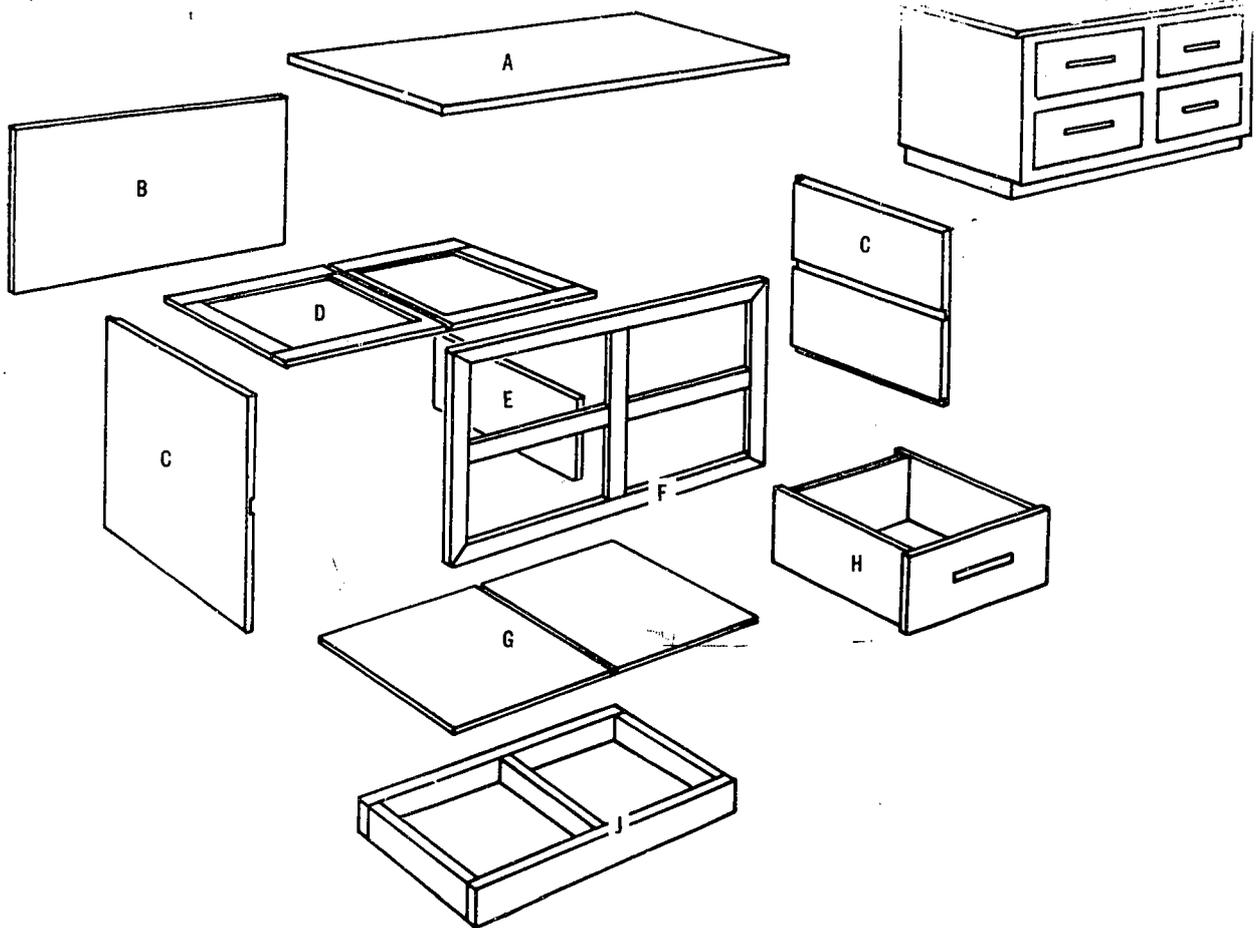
Exploded drawing showing the basic subassemblies and the component parts of a cabinet (top right): (a) top, (b) back, (c) ends, (d) drawer frame, (e) division, (f) face frame, (g) bottom, (h) drawer, (i) base frame
